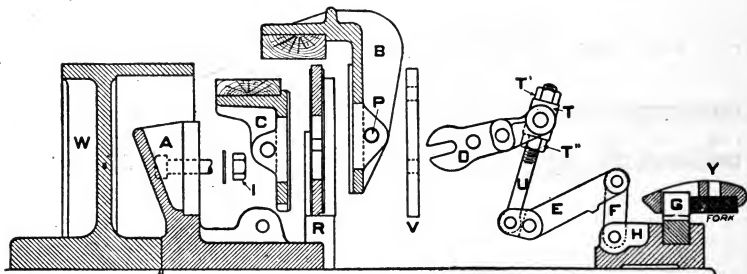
,253.—Sectional view of Hill clutch mechanism. In every case the mechanism hub A, and in a clutch coupling the ring W, is permanently and rigidly secured to the shaft and need not be disturbed when removing the wearing parts. When erected, the adjustment should be verified, and always with the clutch and ring engaged and at rest. If the jaws do not press equally on the ring, or if the pressure required on the cone be abnormal, loosen the upper adjusting nuts T', on eye bolts and set up the lower adjusting nuts T'', until each set of jaws is under the same pressure. Should the clutch then slip when started it is evident that the jaw pressure is insufficient and a further adjustment will be necessary. All clutches are equipped throughout with split lock washers. Vibration or shock will not loosen the nuts if properly set up. The jaws can be removed parallel to the shaft as follows: Remove the gibs V, and withdraw the jaw pins P, then pull out the levers D. Do not disturb the eye bolt nuts T' and T''. The outside jaws B, can now be taken out. Remove the bolt nuts I, allowing the fulcrum plates R, to be taken off. On the separable hub pattern the clamping bolts must be taken out before fulcrum plate is removed. The inside jaws C, may now be withdrawn. Oil the moving parts of the clutch. Keep it clean. Examine at regular intervals.
